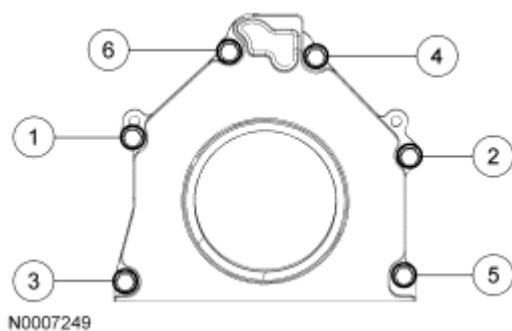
Tightening Sequence Of Crankshaft Rear Seal Retainer Plate Bolts
